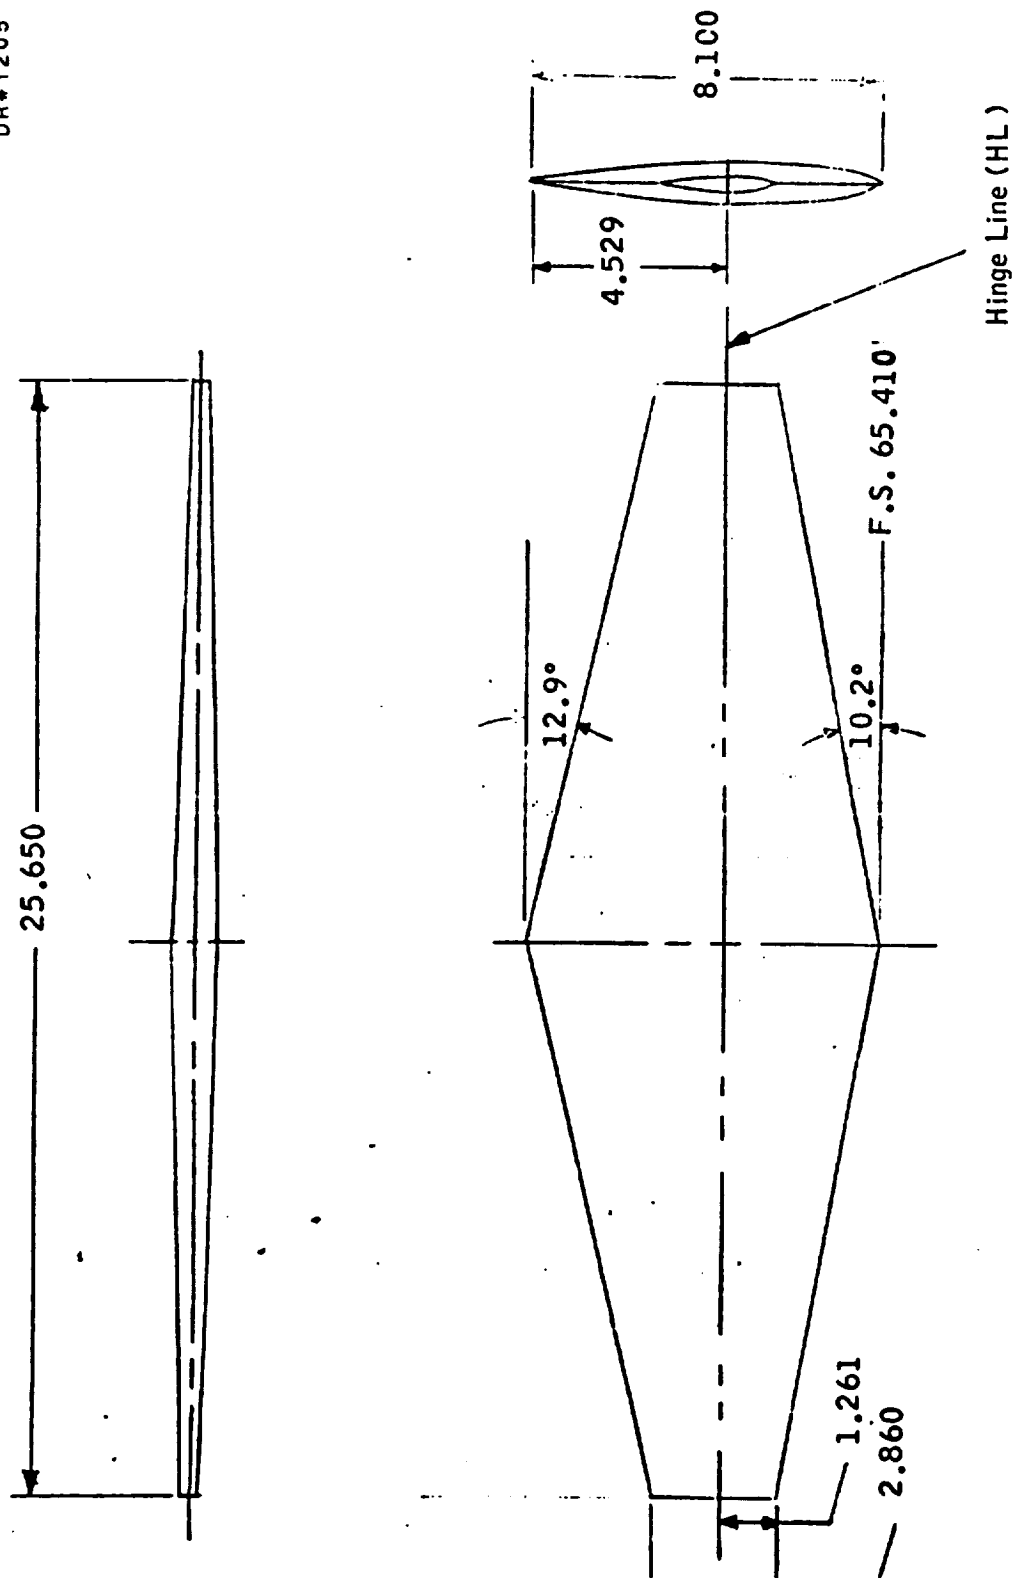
Horizontal tail H₆ (all dimensions in inches)
